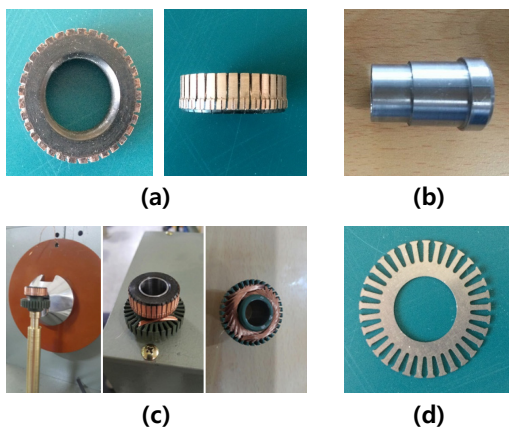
Configuration of rotor part. (a) Commutator, (b) Shaft, (c) Coil winding and (d) Core
